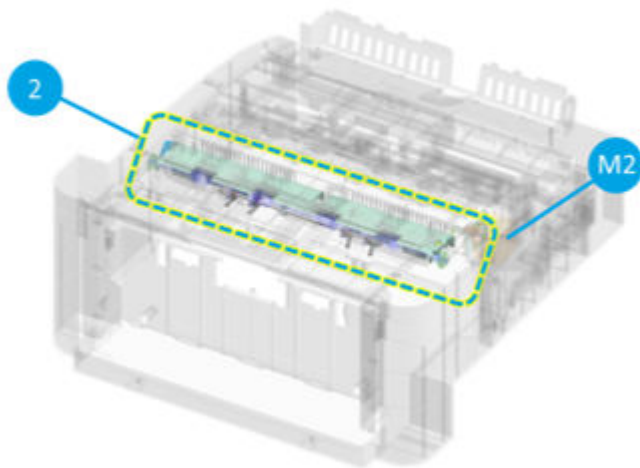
Inner finisher system - paddle unit driving system detail view (1/2)
